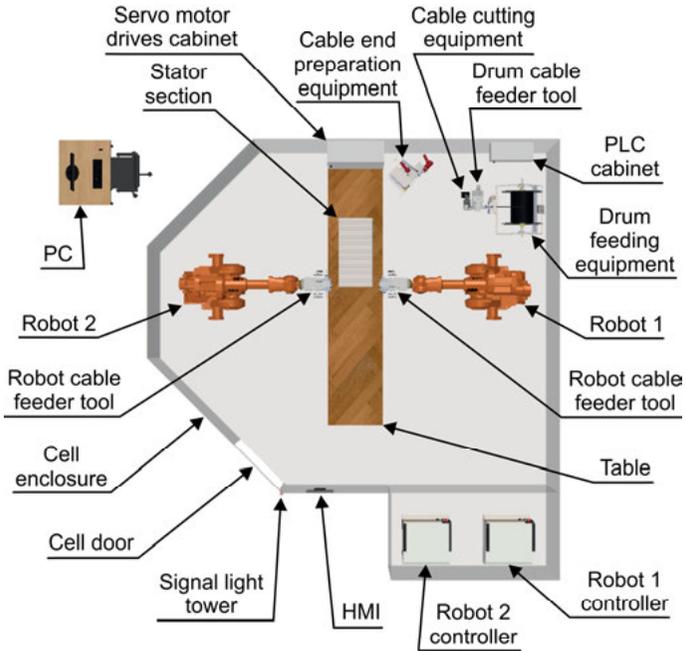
A 3D-CAD model explaining the main components of the second constructed prototype version of the stator cable winding robot cell.
